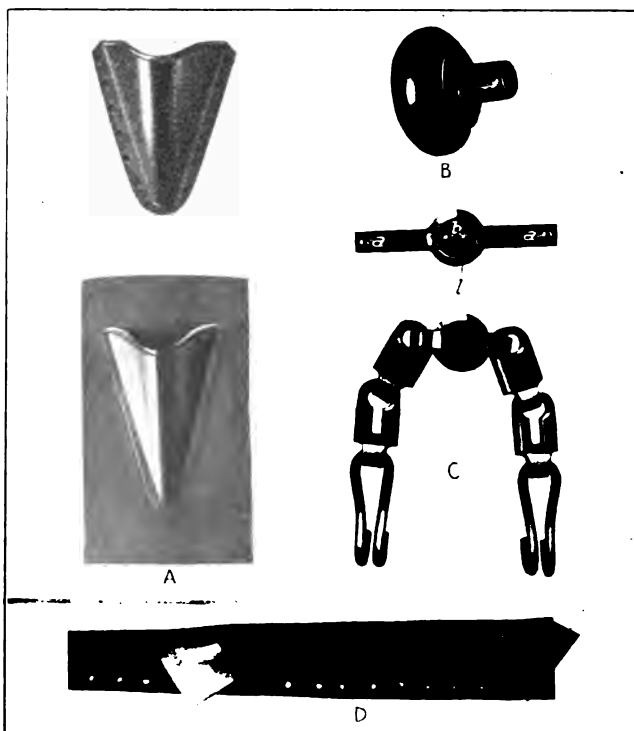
Illustration of the Application of the Point Method of Electric Welding
